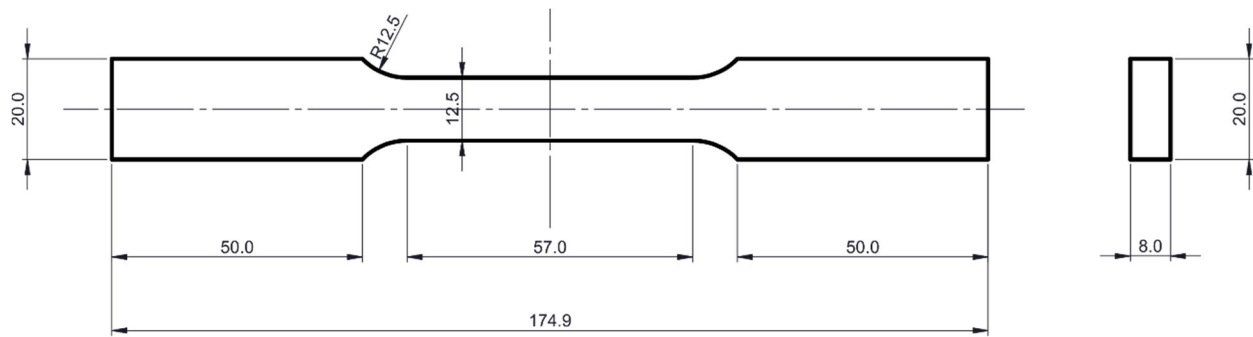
Flat “dog-bone” steel specimen samples, dimensions in mm.
